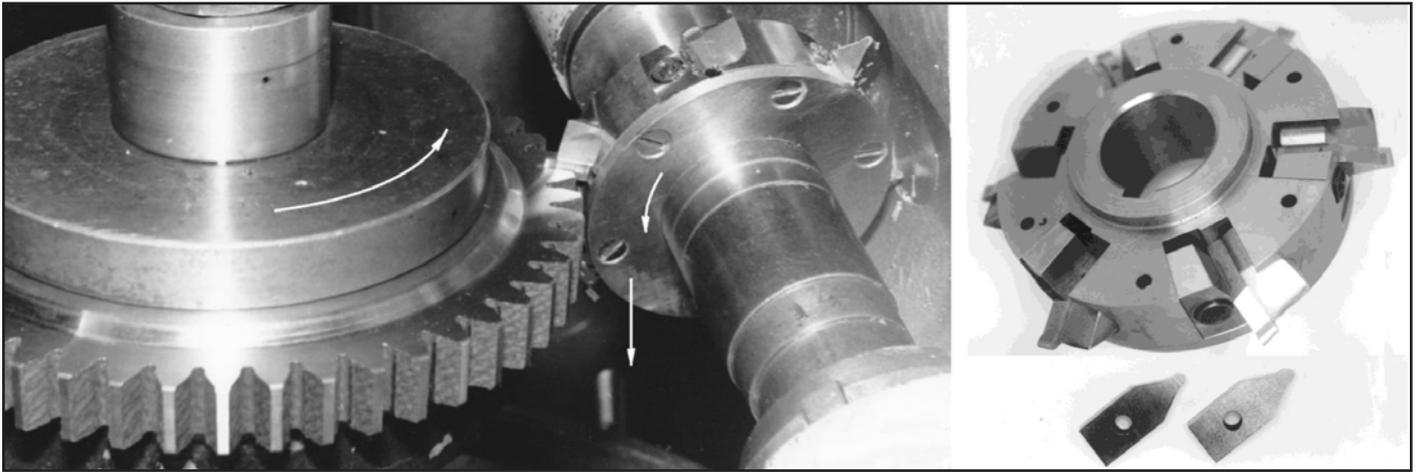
Gear fly cutting: a) hobbing machine set-up; b) adjustable fly cutter with inserts.
